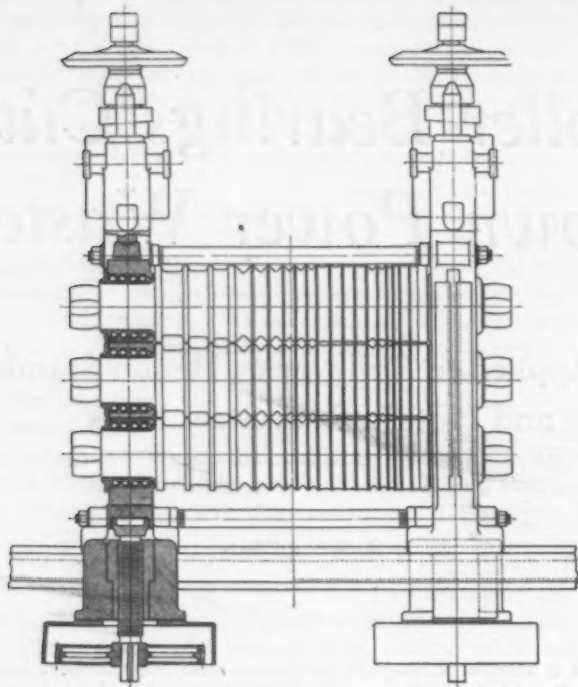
Typical Application of Bearings to a 3-High Rolling Mill
